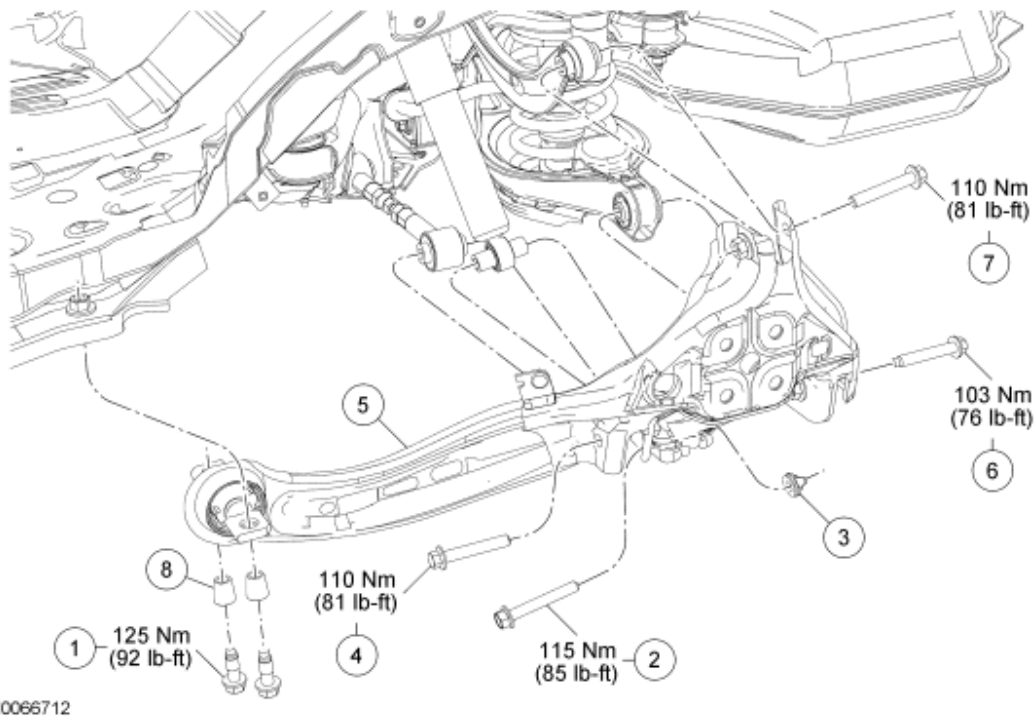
Exploded View Of Trailing Arm With Torque Specifications - Front Wheel Drive (FWD) Vehicles
